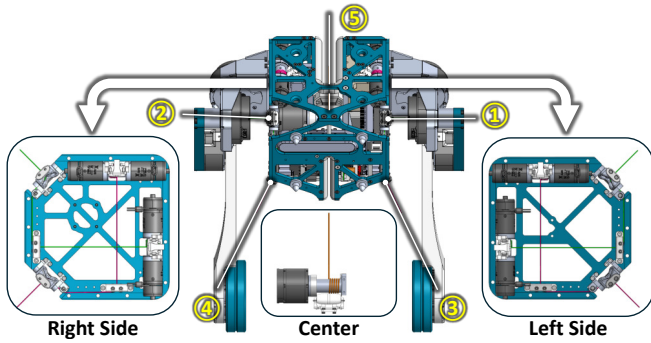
Arrangement of the wire winding modules on the main body. WiXus is equipped with a total of five modules: four modules for environmental anchoring are mounted on the sides, while a single module for tool attachment is located at the center.
